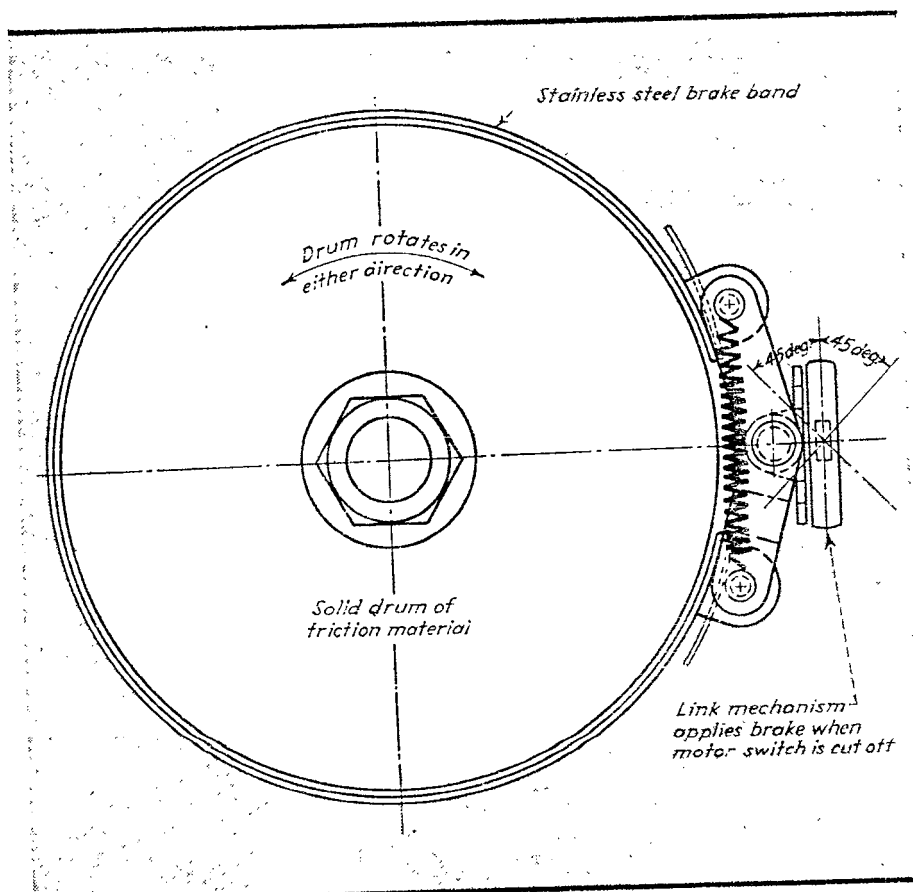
A recent design of a small motor brake in which the drum is a wheel of molded friction material and the rubbing surface is a flexible band of steel.
